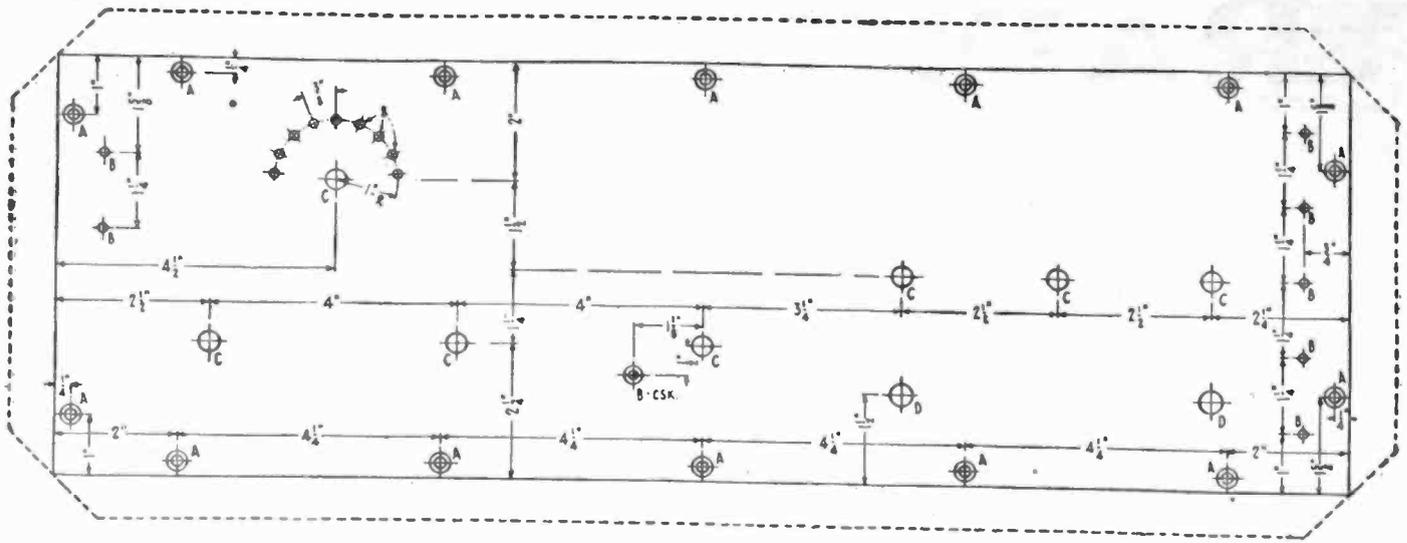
The panel layout shows the mounting holes in the panel on a small scale, the actual location with dimensions.
